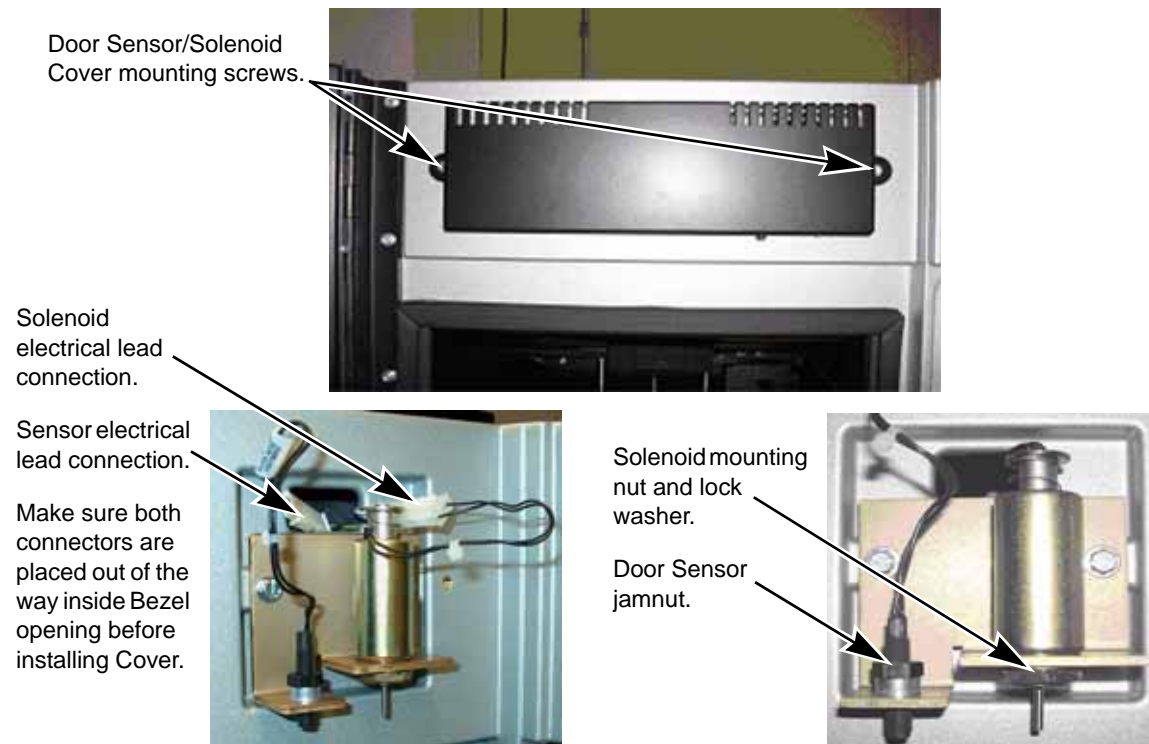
Door Solenoid and Door Sensor Removal / Installation
